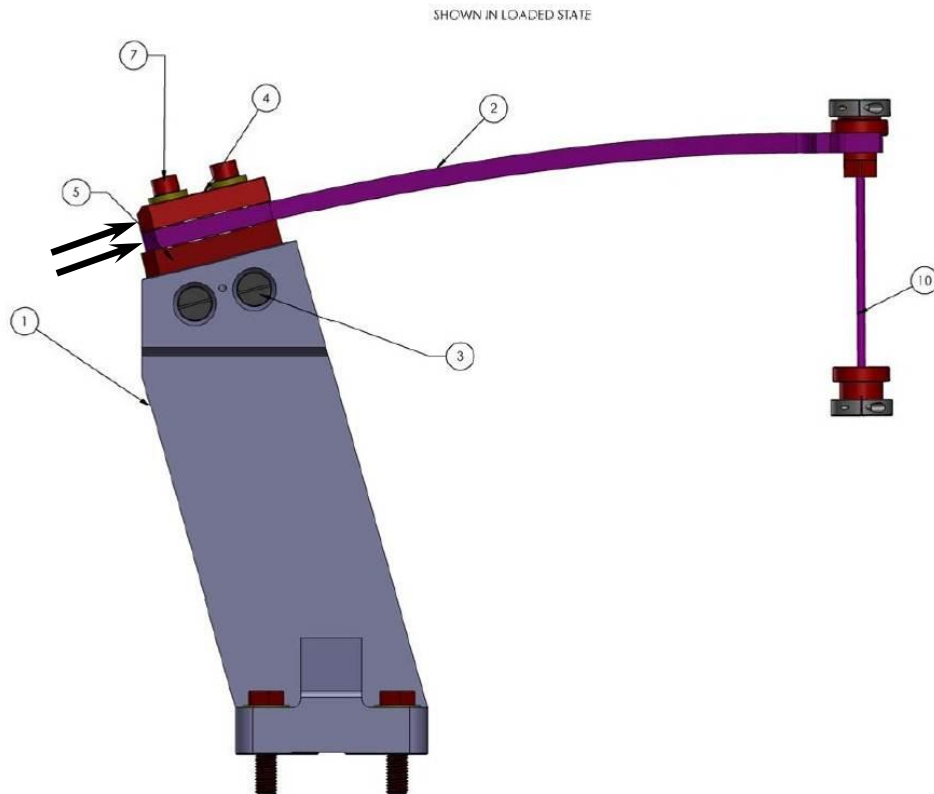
D0901197 Stage 0-1 Blade Assembly Drawing in the Loaded State
